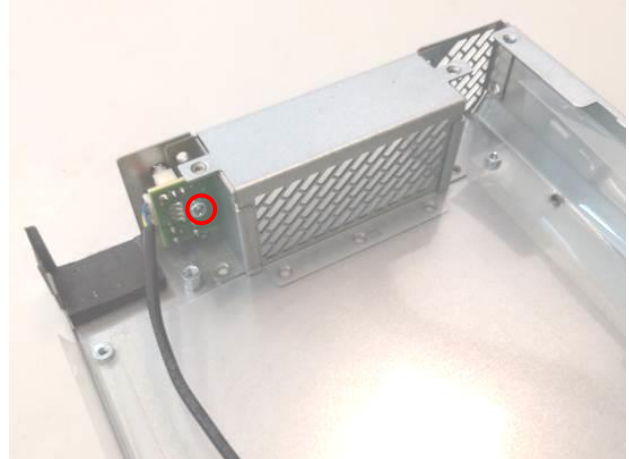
Take out LED & S/W sub-assembly with cable from bottom chassis.
